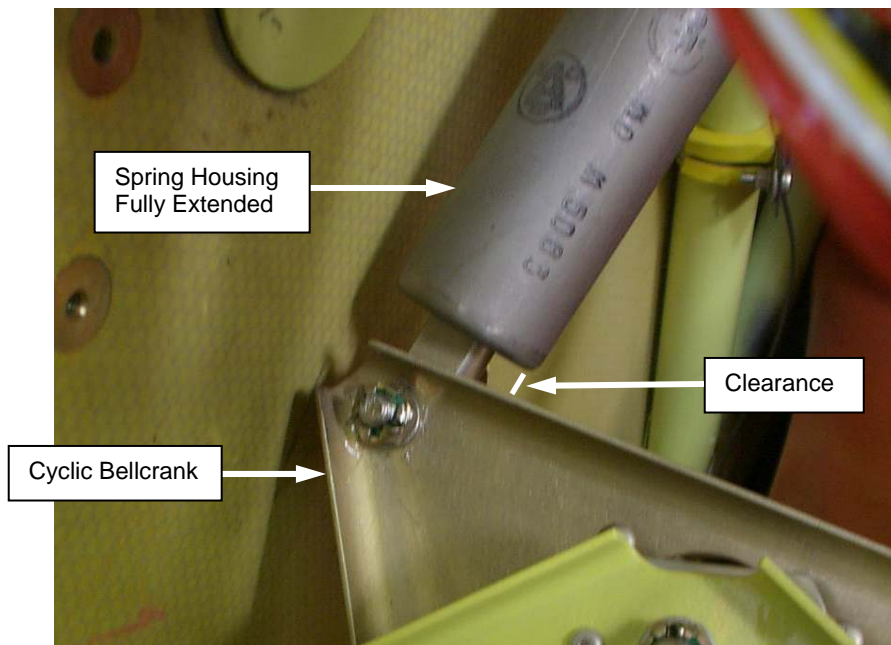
Spring Housing and Cyclic Bellcrank Clearance
